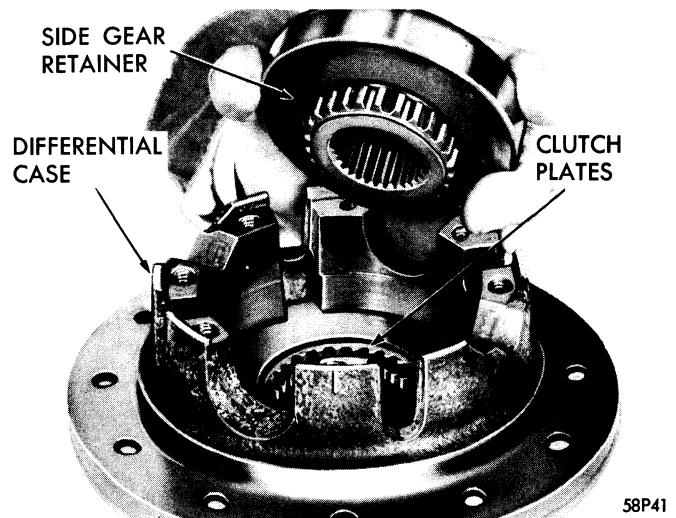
Removing or Installing Side Gear Retainer from Differential Case
